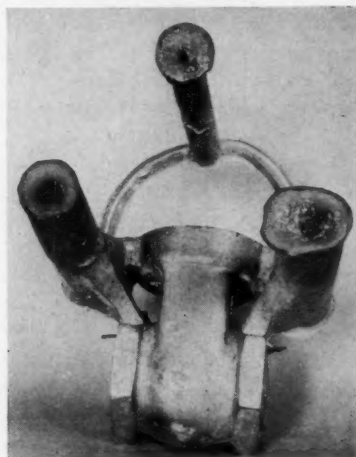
QUICK OPENING 3 IN. GATE VALVE BODY—SHOWING IMPROVED METHOD OF GATING.
